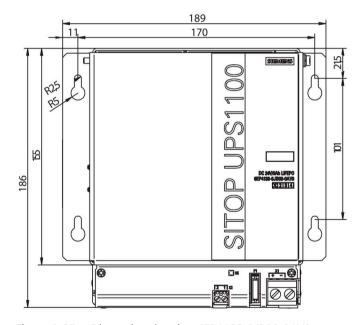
Dimension drawing 6EP4132-0GB00-0AY0
